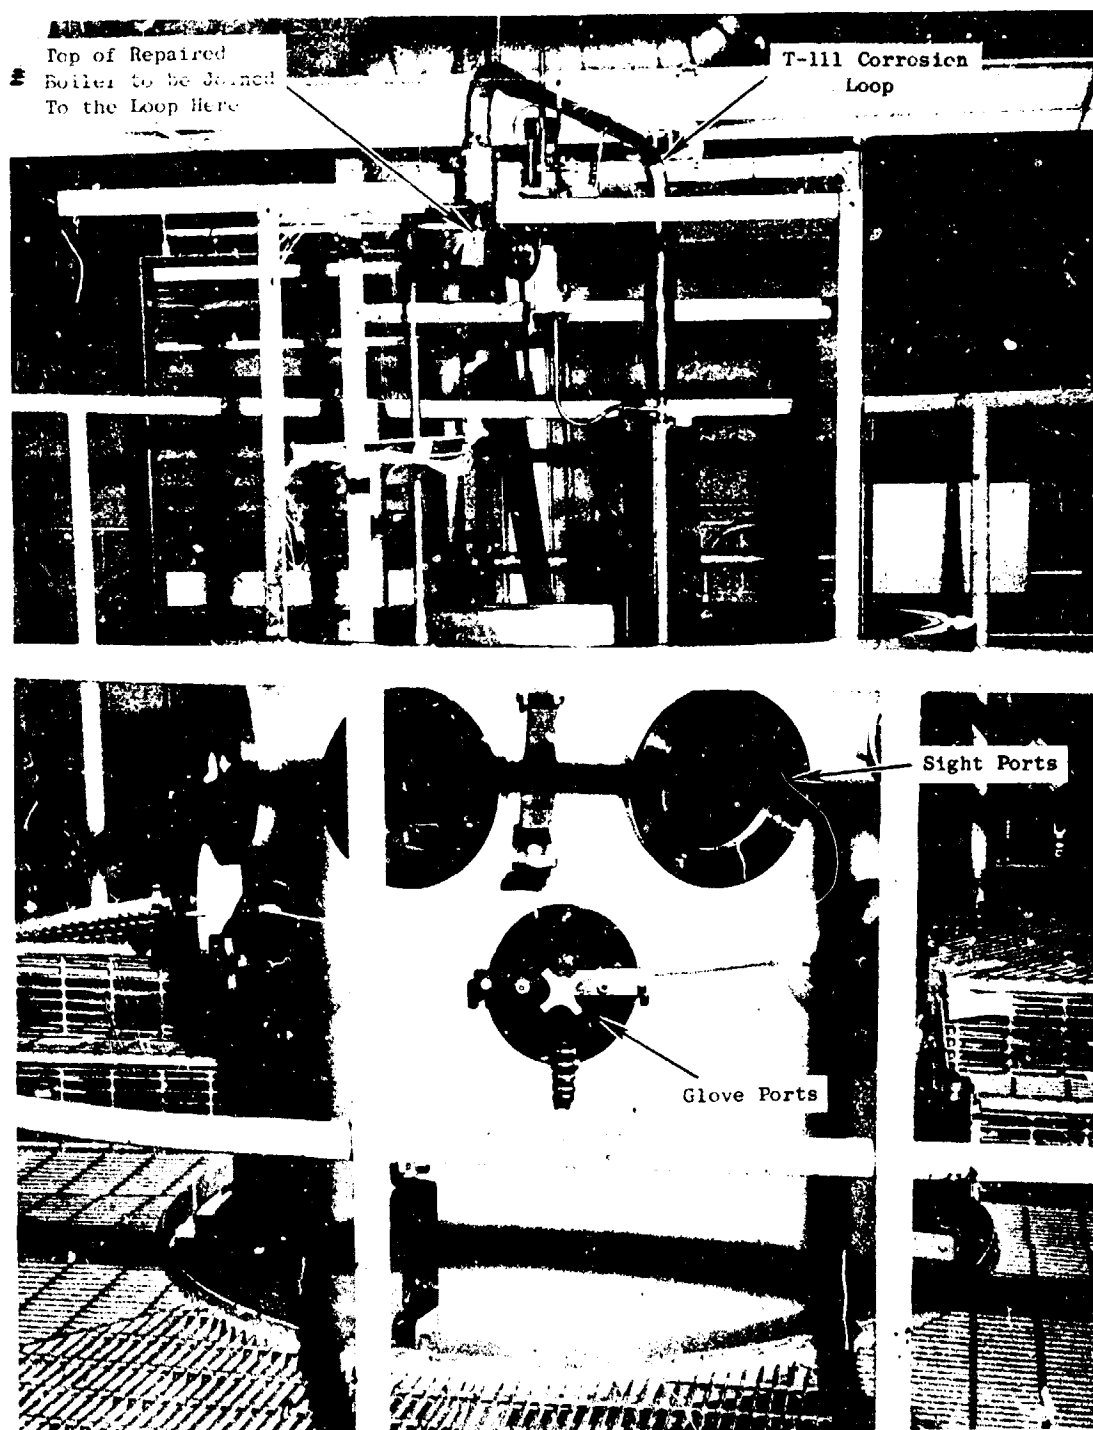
Installation of the Welding Chamber Around the T-111 Corrosion Loop. Lower Spool Piece in Position. (C68090429)
